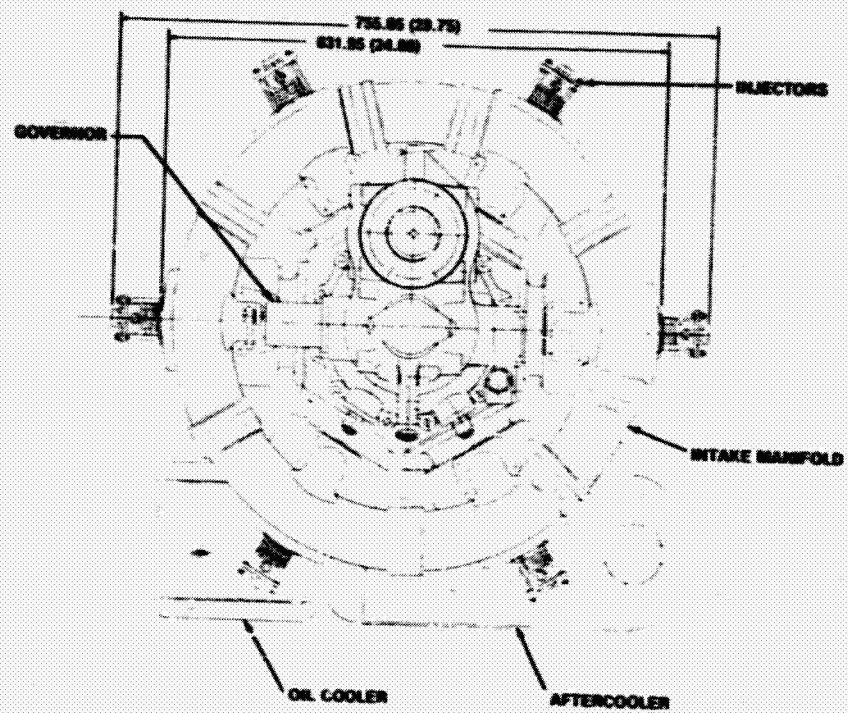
25 kW AIRCRAFT DIESEL—FRONT VIEW
